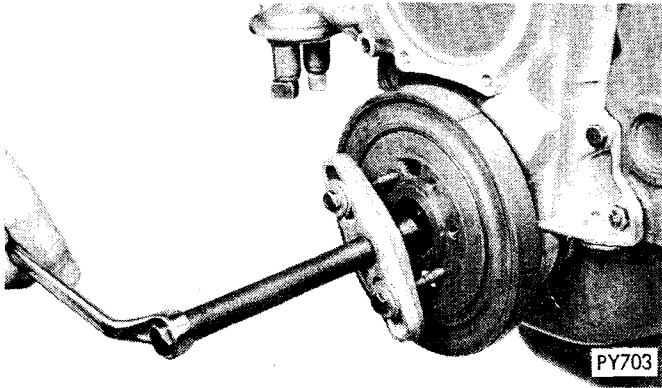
Removing Vibration Damper Assembly 318 Cubic Inch Shown (Typical)
